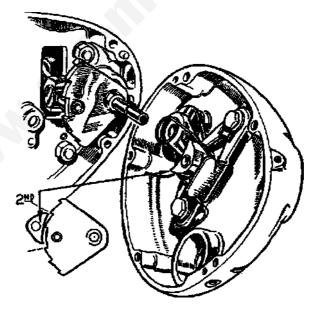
PAWL-OPERATING SPRING ON A.M.C. TYPE GEARBOX.
